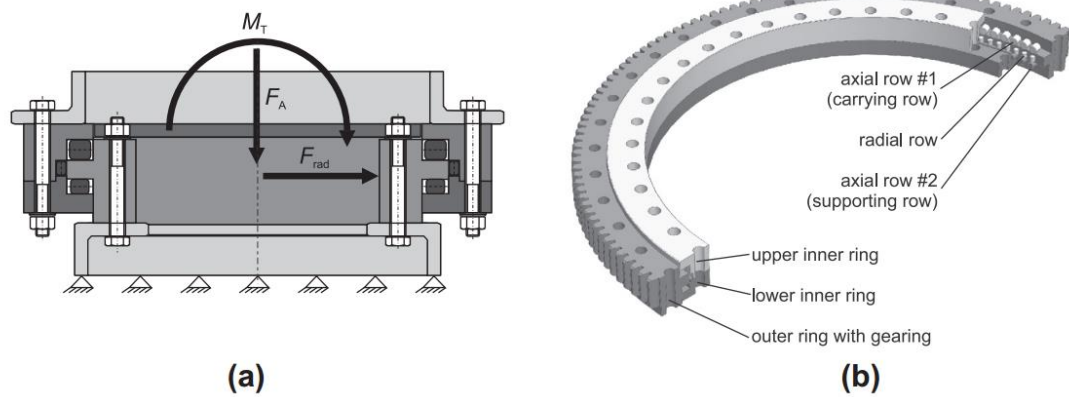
External loads on a large roller slewing bearing assembly (a), components of a large three-row roller slewing bearing (b) [5].
